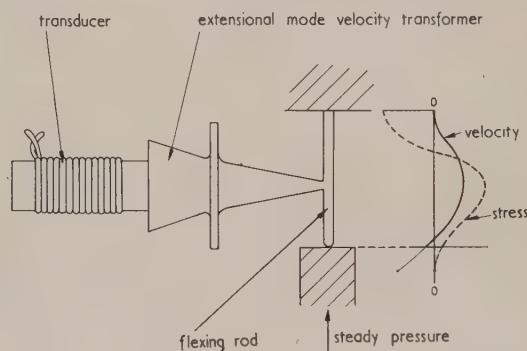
Typical vibrator for ultrasonic cold welding
